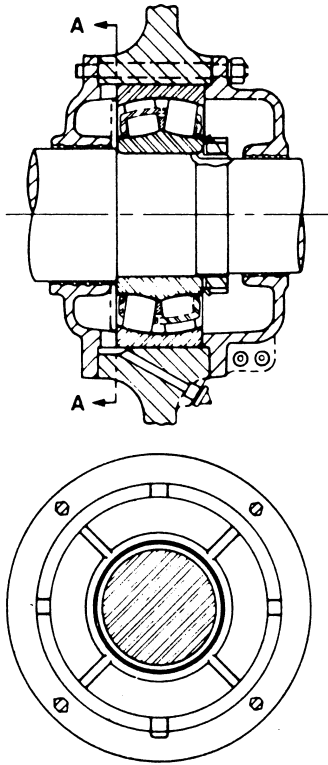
Bearing housing for a large electric motor (from SKF, 1992, with permission).
